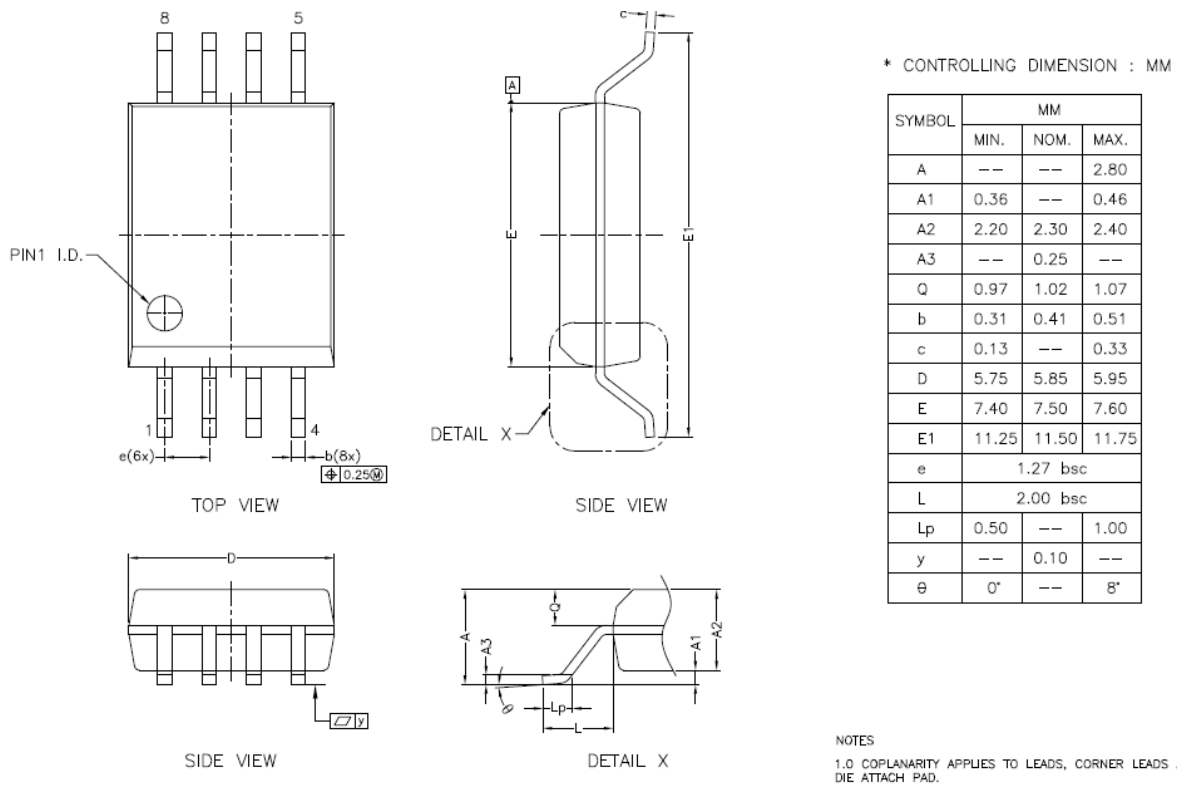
SOW8 Package Shape and Dimension in millimeters and (inches)
